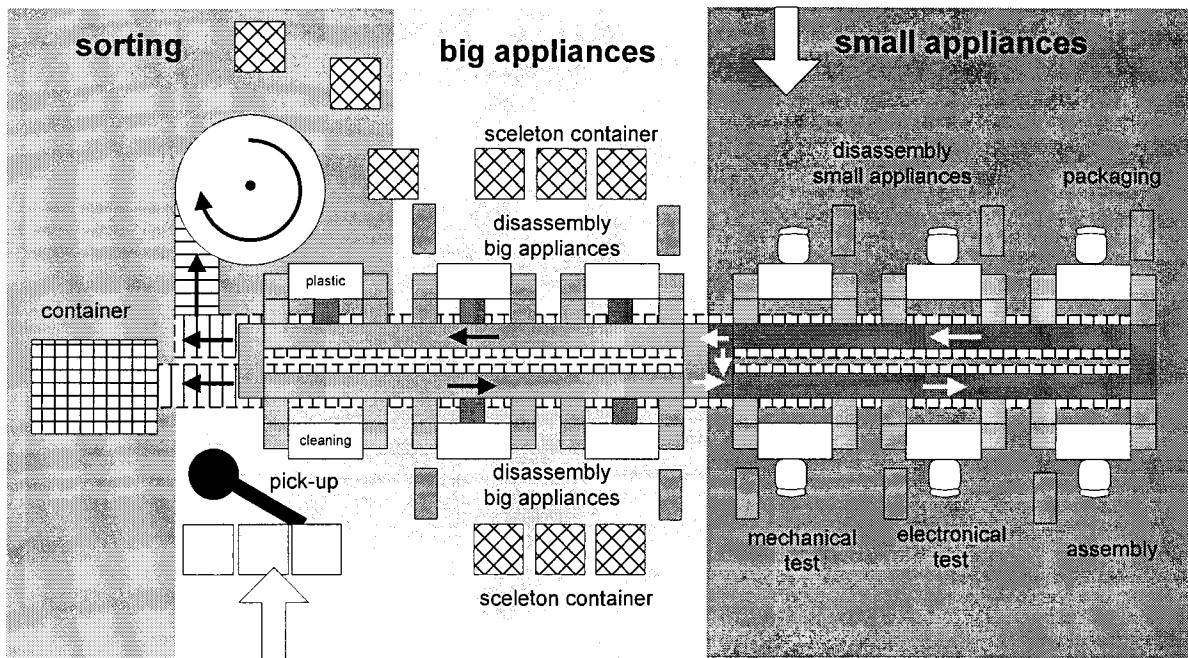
Layout of a disassembly system for multipurpose electronic products
